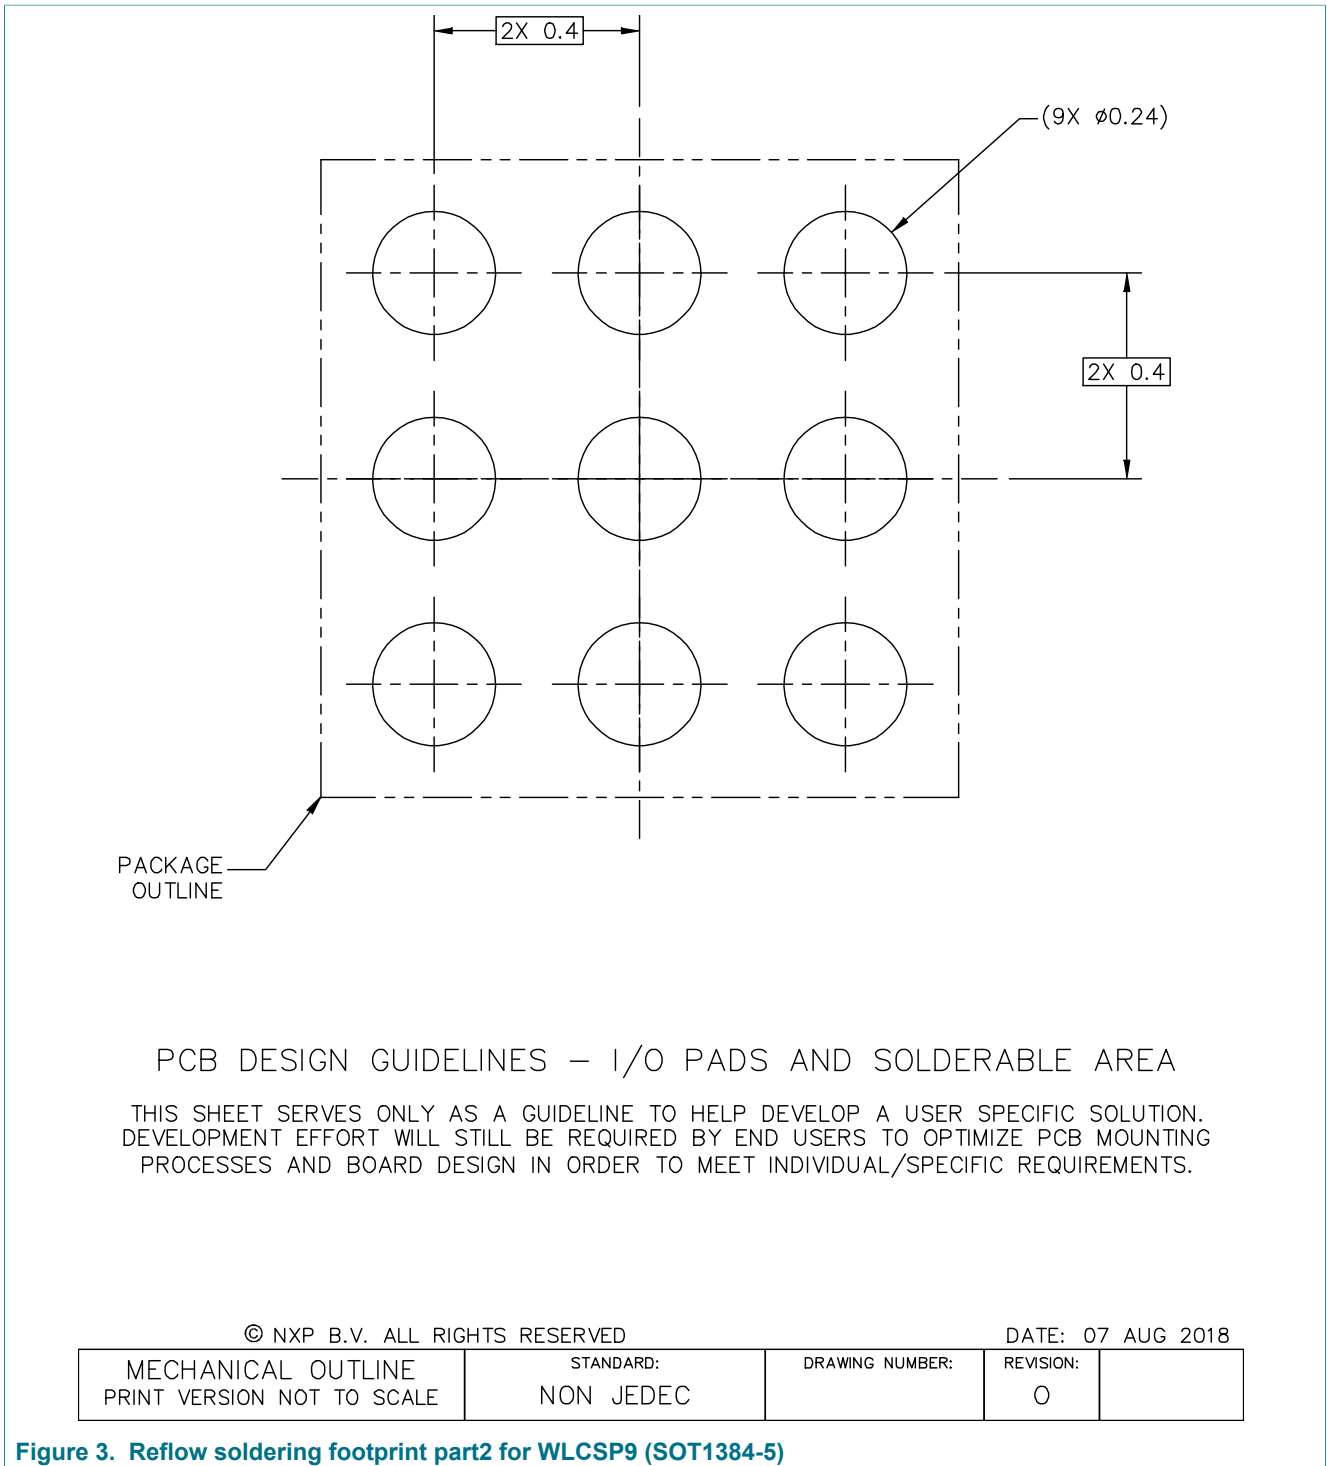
Reflow soldering footprint part2 for WLCSP9 (SOT1384-5)
